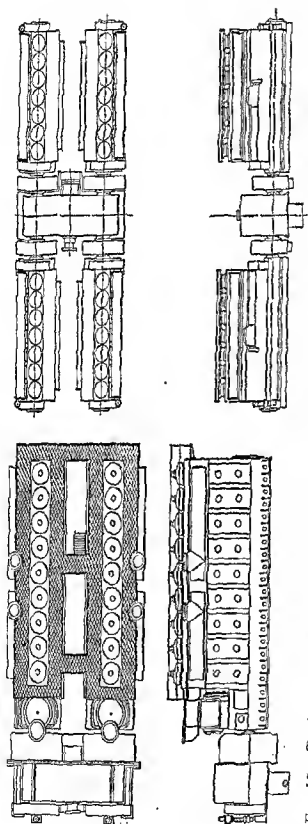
Typical arrangements of two-engine and four-engine gear drives. (From D.E.M.A. Marine Diesel Standards.)
